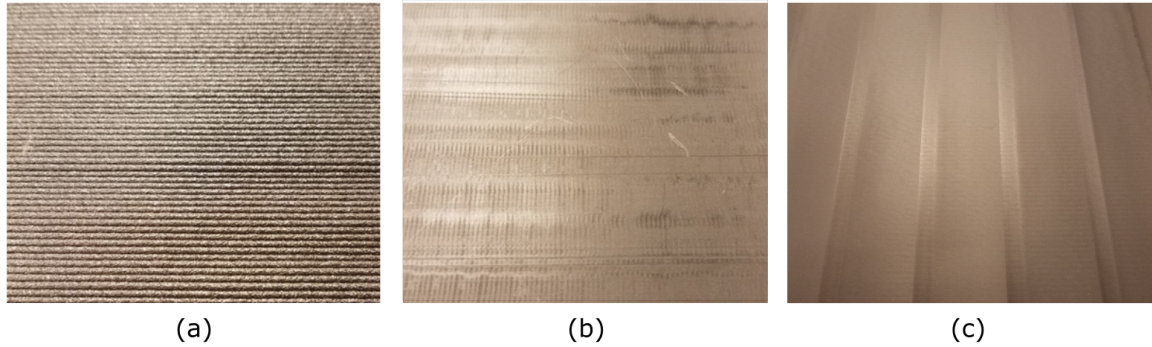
Surface of the 2-bead wall plate (a) after 3D printed, (b) after machined with the planer, and (c) after machined with CNC.
